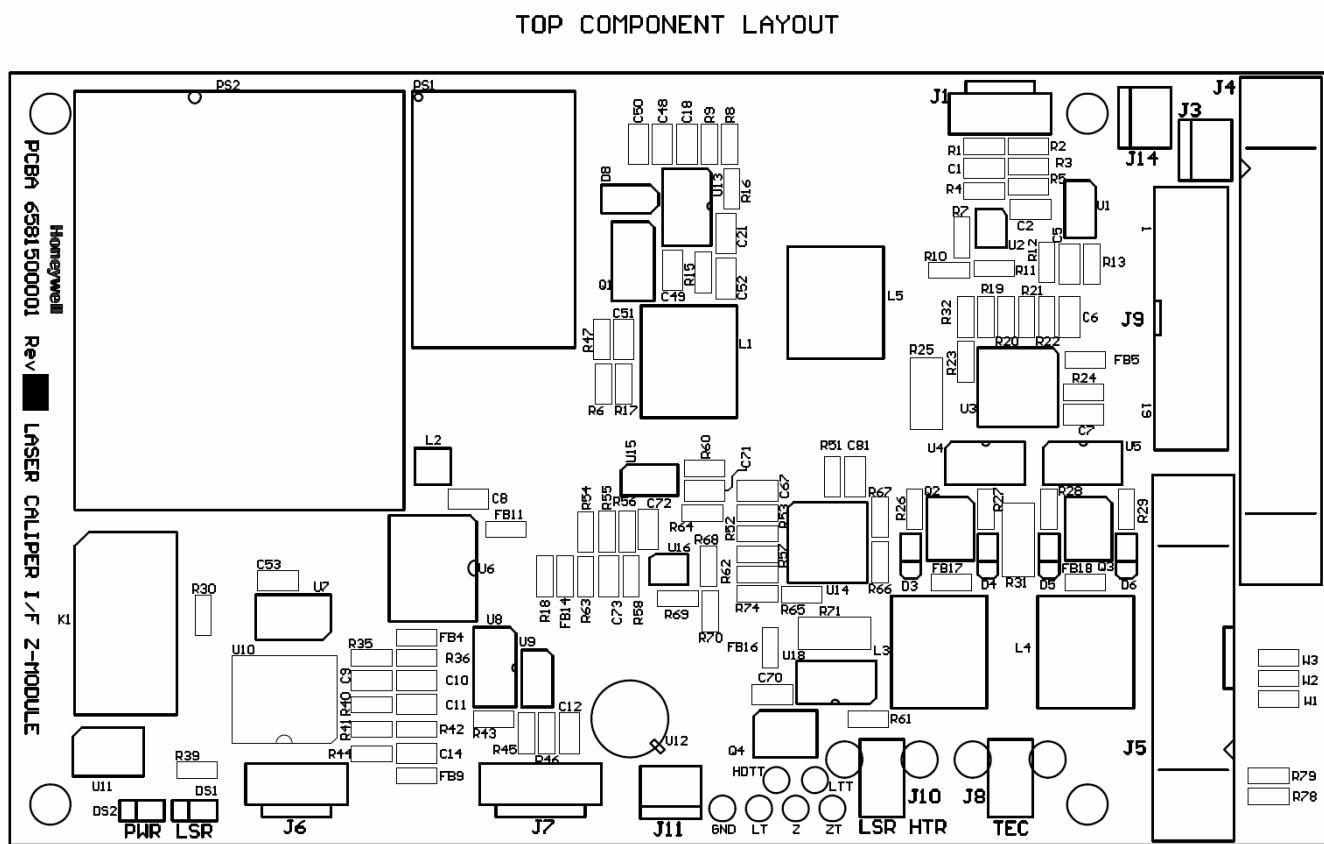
Layout of z-module interface PCBA (6581500001). The test points are in the middle of the bottom edge
